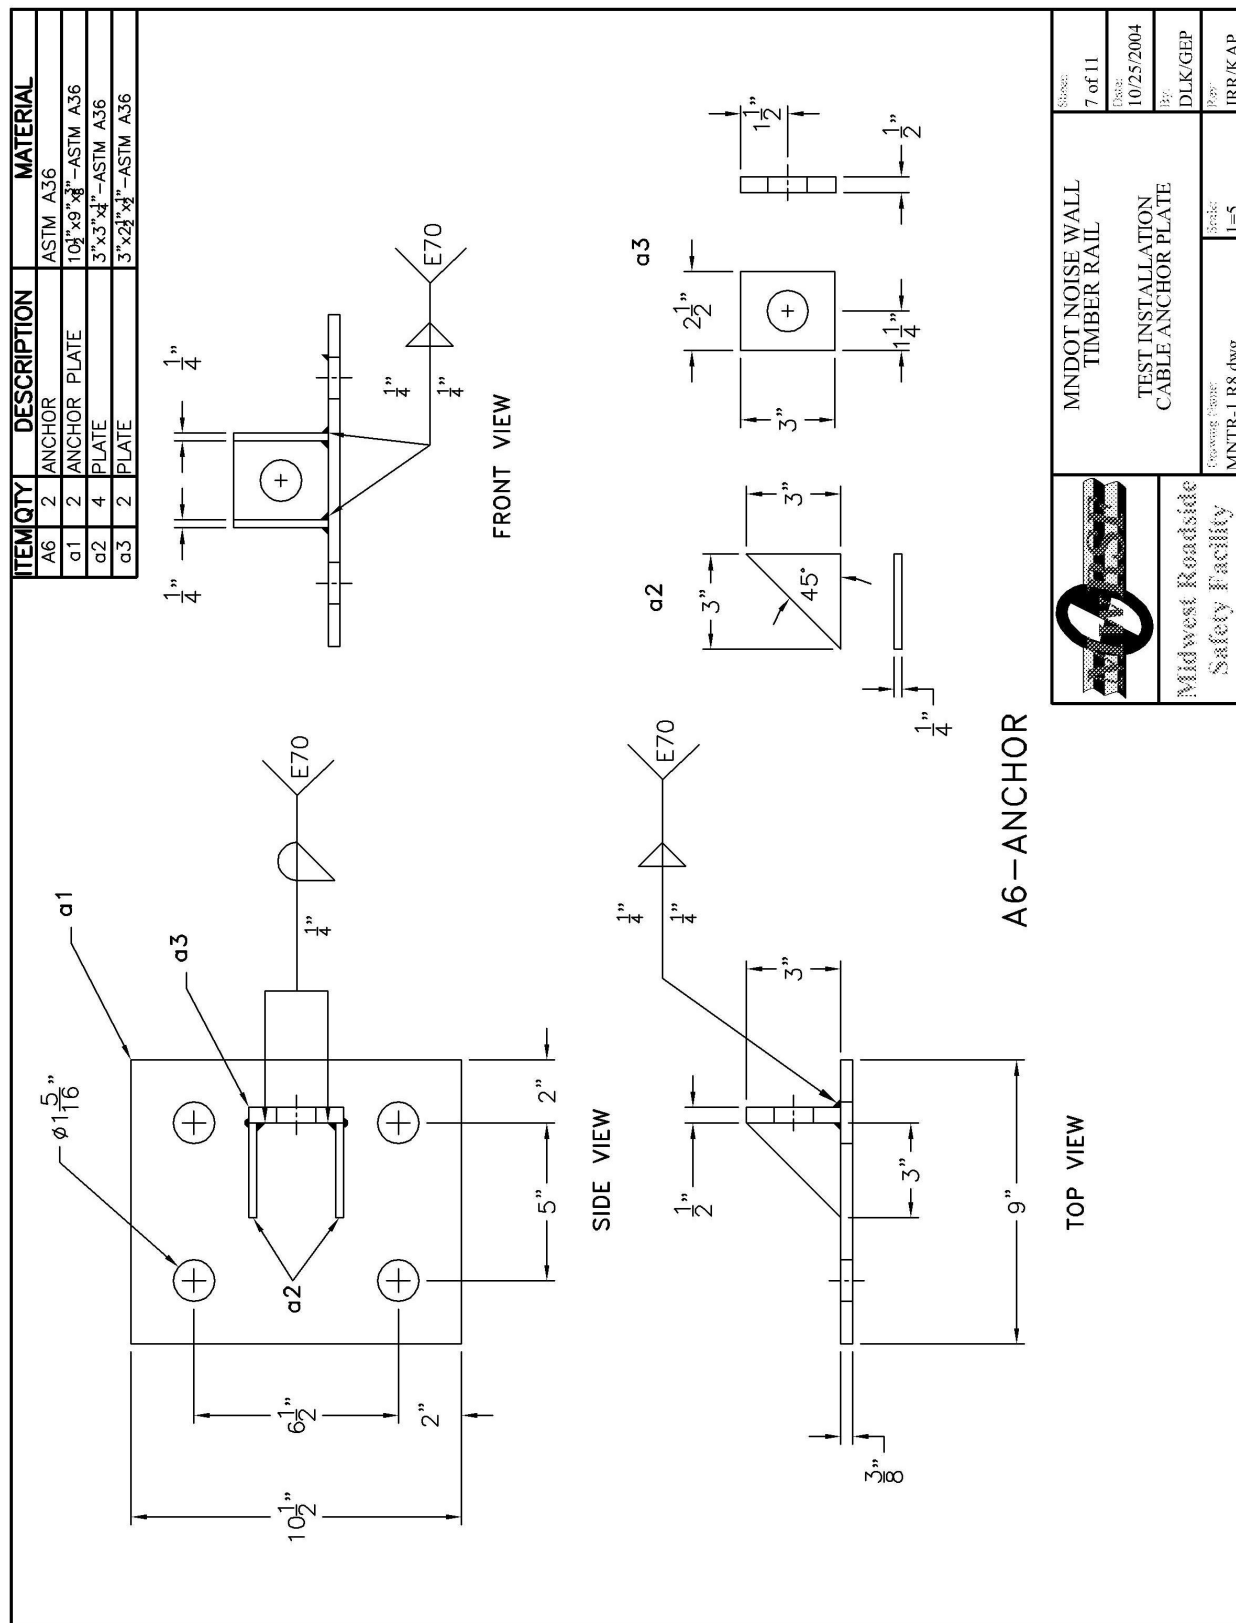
Mn/DOT's Timber Rub Rail Design Cable Anchor Plate Details (English)
